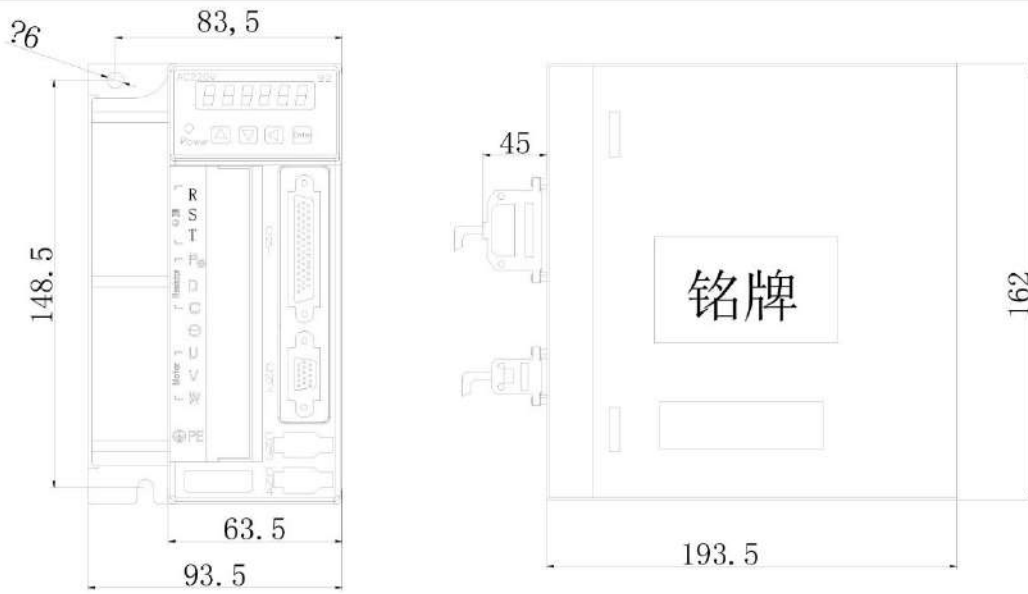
Side figure of DZ-20B2,DZ-30B2 series installation dimension
